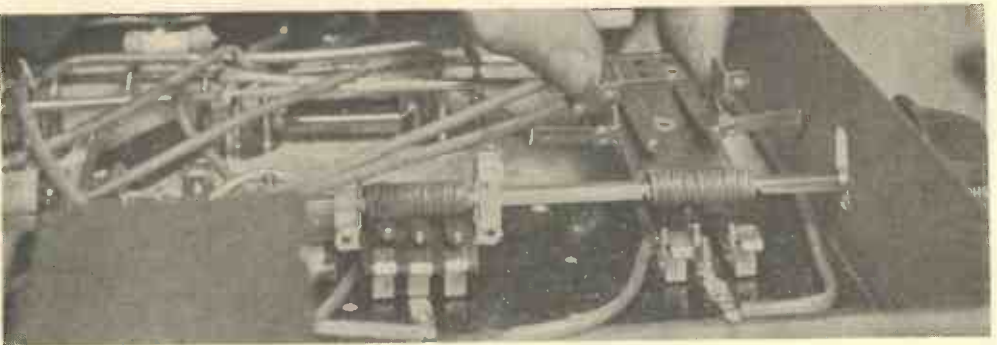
METHOD OF REMOVING THE SWITCH PLATFORM.
